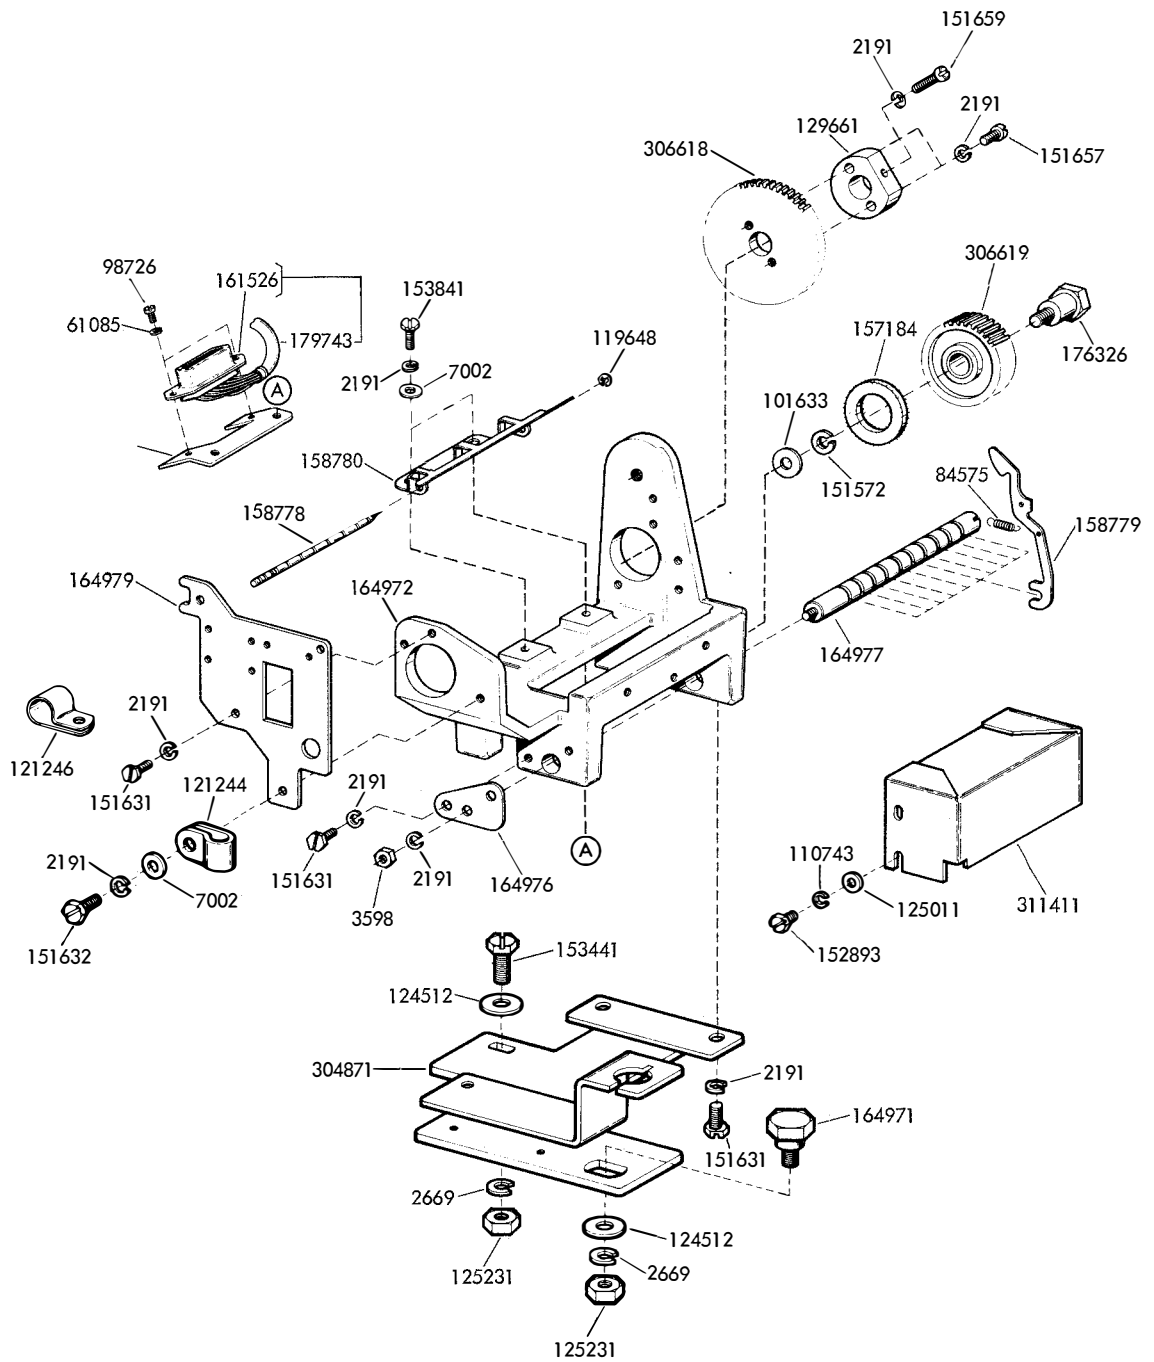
FRAME MECHANISM (RACK MOUNTED)
